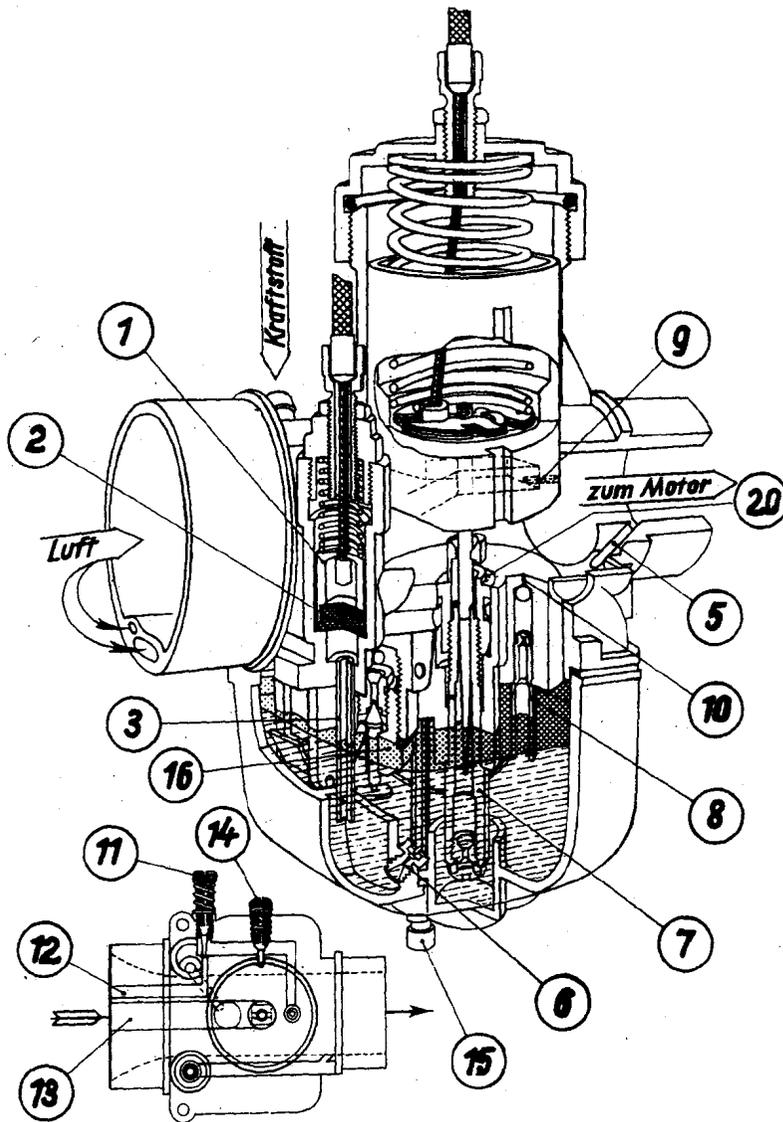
Carburettor BVP 30 N 2-5 (starting carburettor), sectional view
